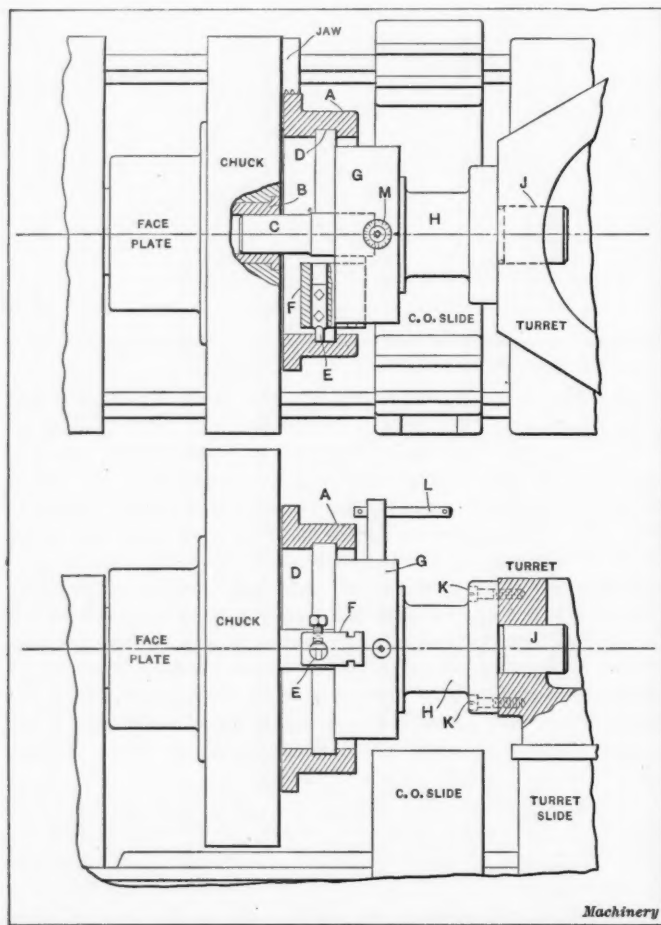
A Recessing Tool for a Large Collar, used in a Turret Lathe
